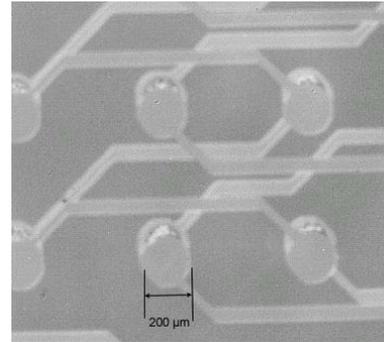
Normarski photograph of two pieces of glass bonded together. The sample is intentionally misaligned to show the bottom solder.
